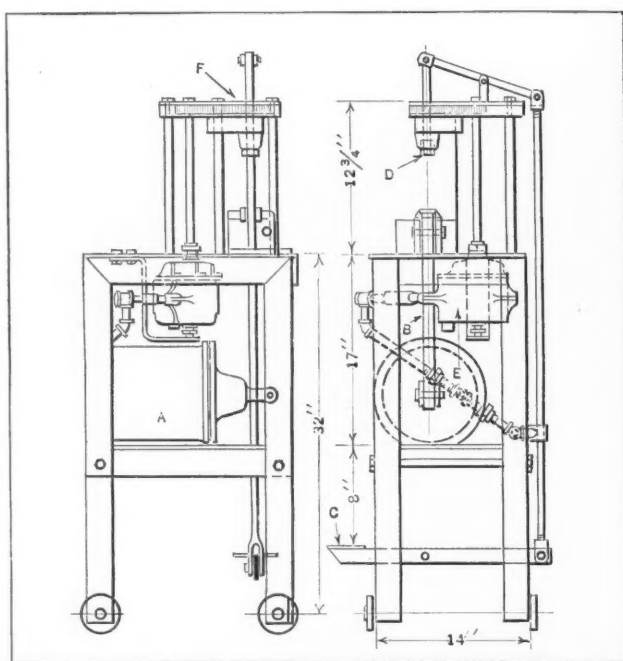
Front and Side Views of Machine Shown in Fig. 1
